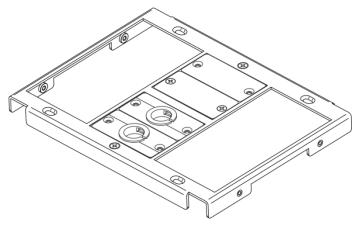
Cable Pass-through Insert (P/N: 80-000499)
